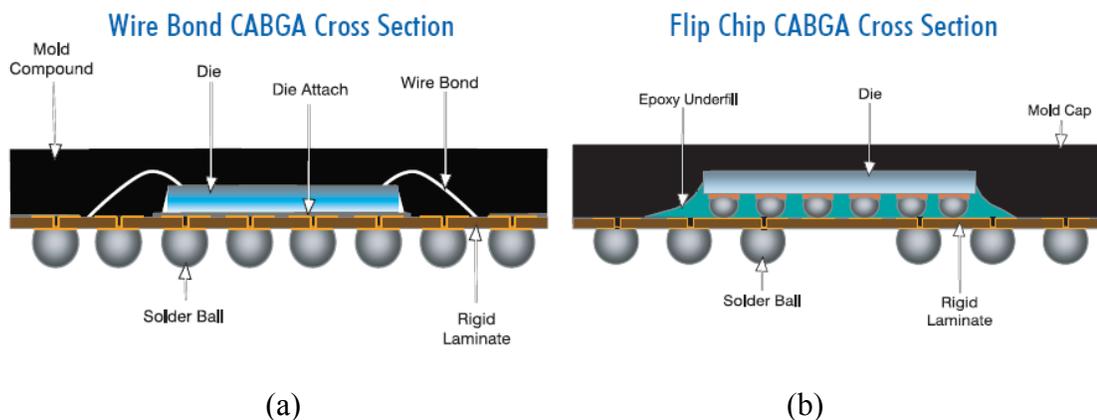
Cross sections of BGAs: (a) wire bond BGA (b) flip chip BGA (Source: Amkor[®])
